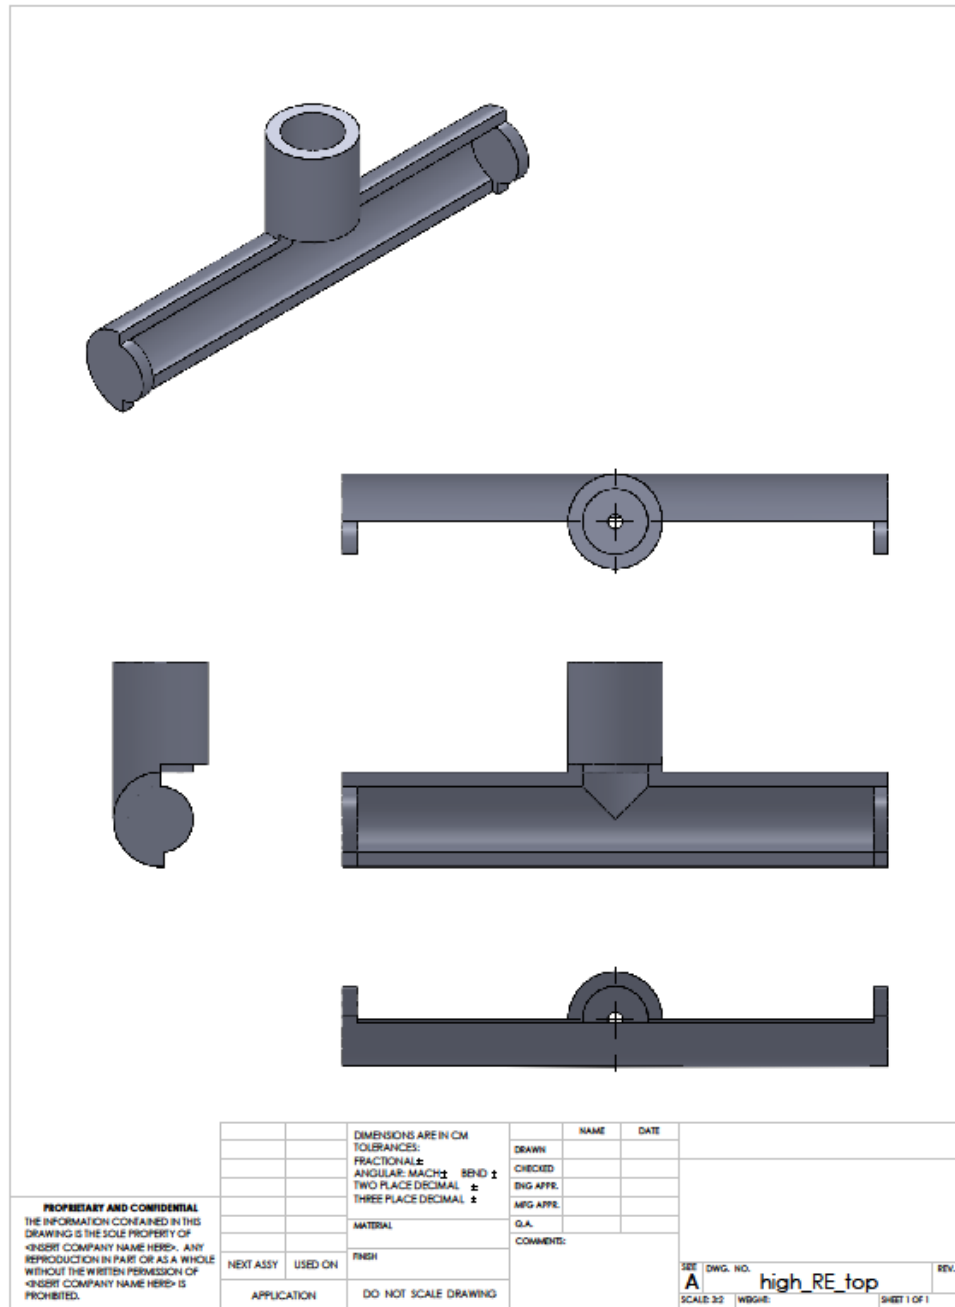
Front, top, bottom, side and isometric view of the main component of the order-100-Re line source.
